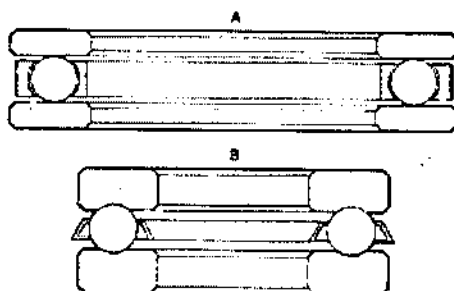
FLAT-RACE, FLAT-SEAT THRUST BALL BEARING, A, AND GROOVED-RACE, FLAT-SEAT THRUST BALL BEARING, B.
